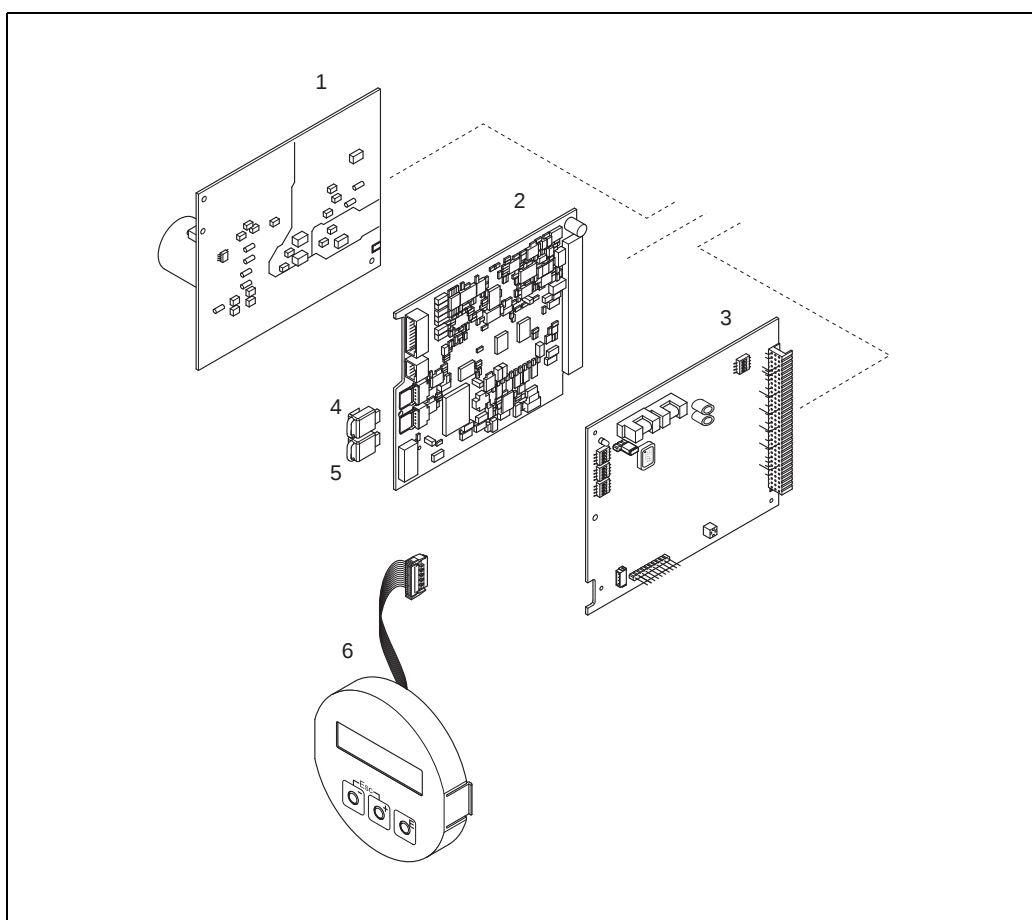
Spare parts for transmitter 65 (field and wall-mount housings)
